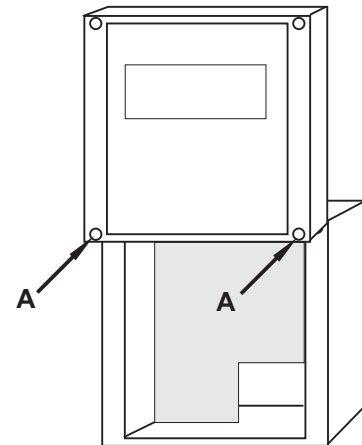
, Use the front cover bottom screws (marked A) to fix the front cover at the enclosures top edge during installation.
